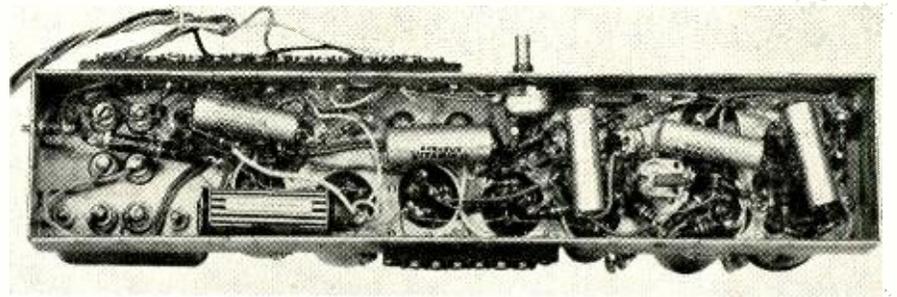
Bottom view of the pickup strip, video amplifier, and phase splitter assembly.
